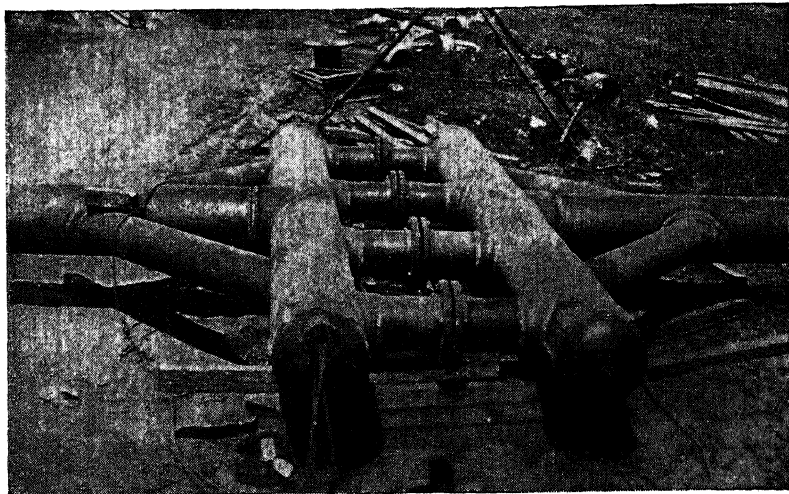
Headers for a 22-in. gas line river crossing, fabricated from pipe. Assembly in pairs as shown permits accurate alignment.
